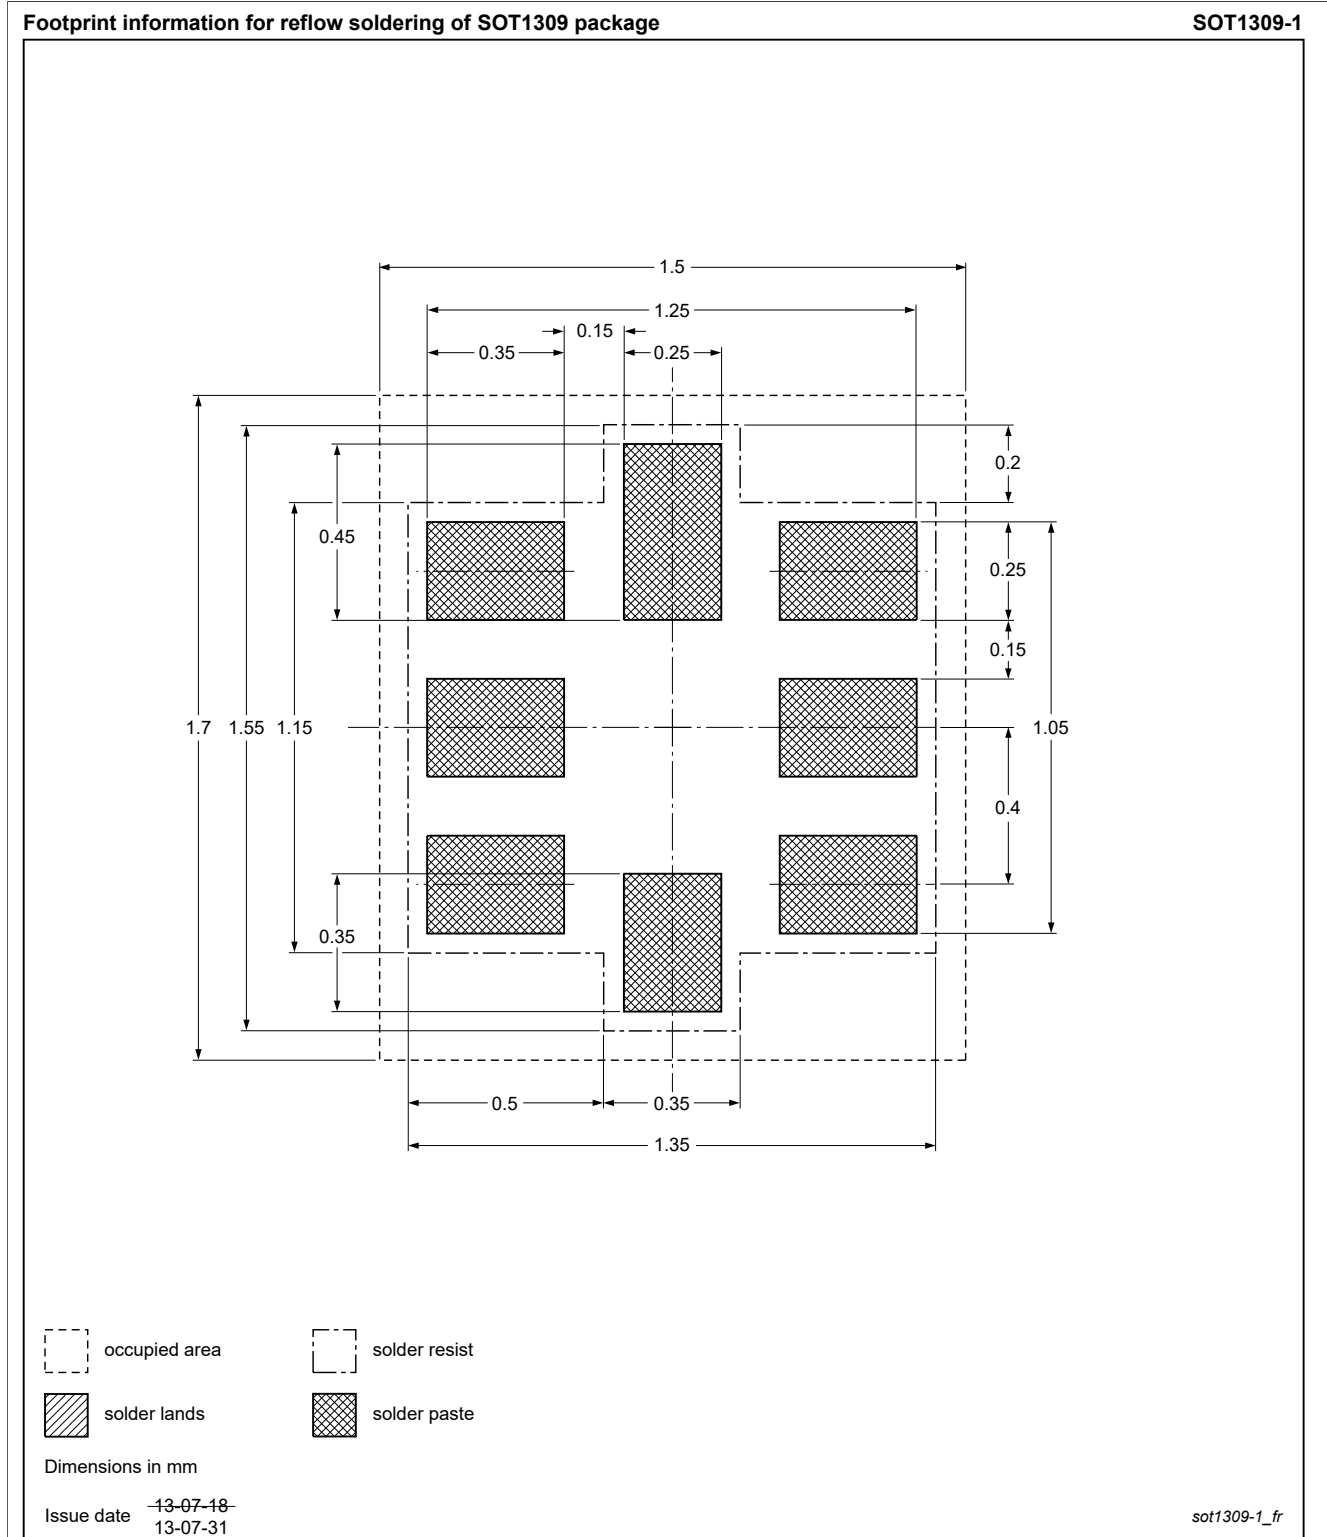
PCB footprint for SOT1309-1 (XQFN8); reflow soldering
